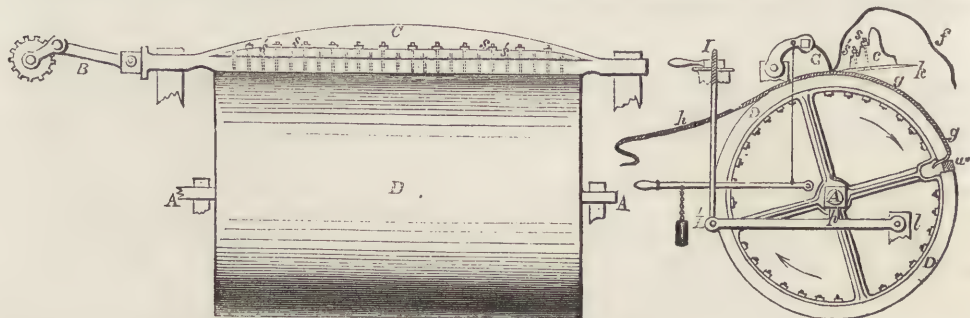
ELEVATION AND SECTION OF HIDE-SPLITTING MACHINE.
